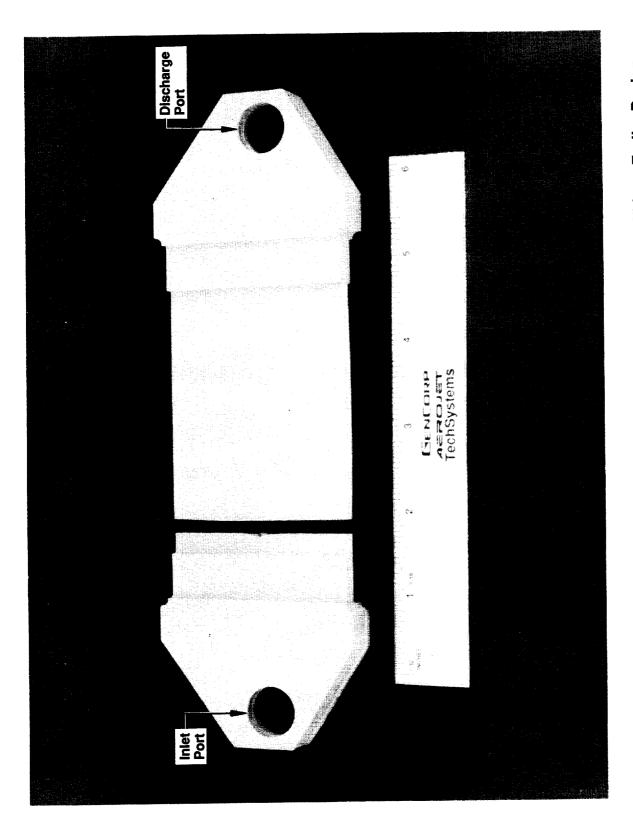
Overall View of Prototype Alumina Regenerator Fabricated With an Earlier Design. This Part was Sectioned for Evaluation
